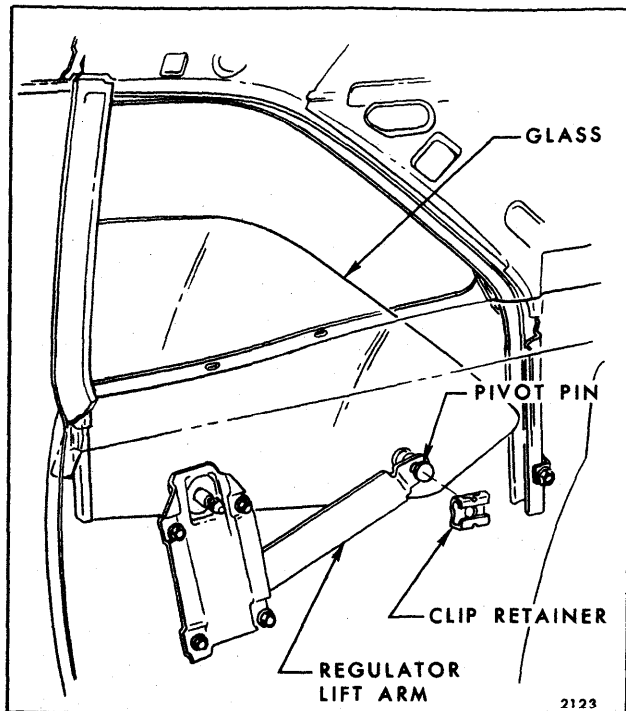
Rear Quarter Window Attachment - "A-07" Styles
